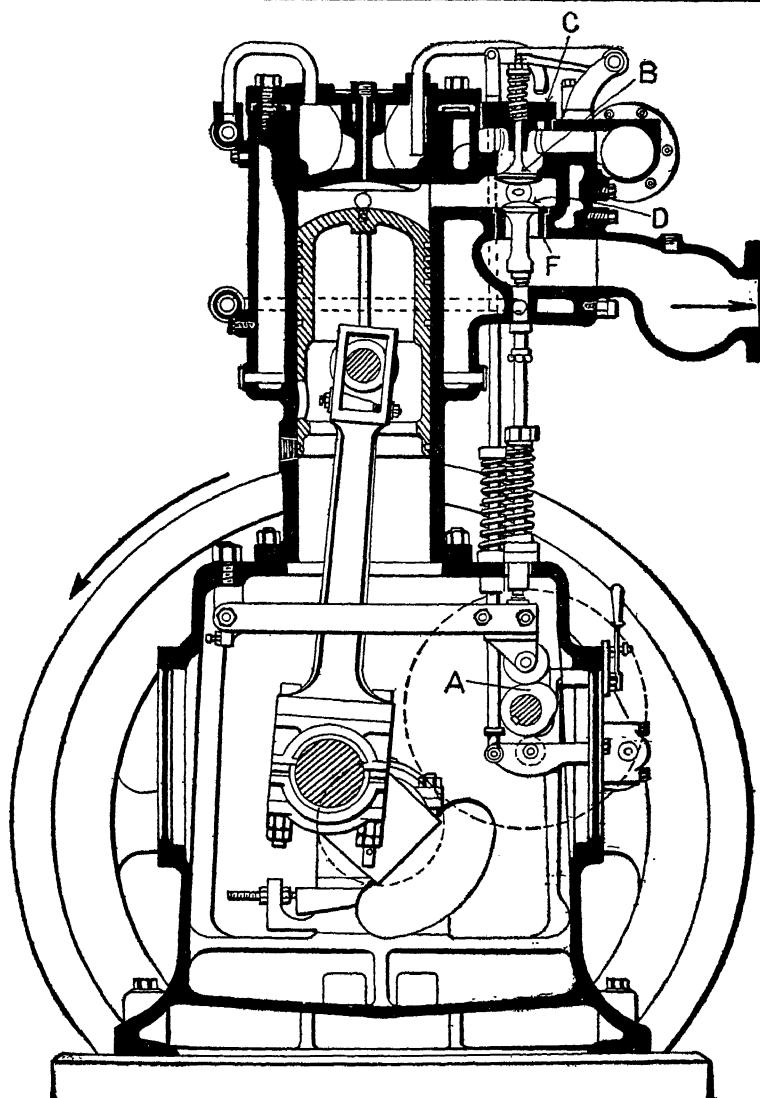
WESTINGHOUSE VERTICAL ENGINE.
